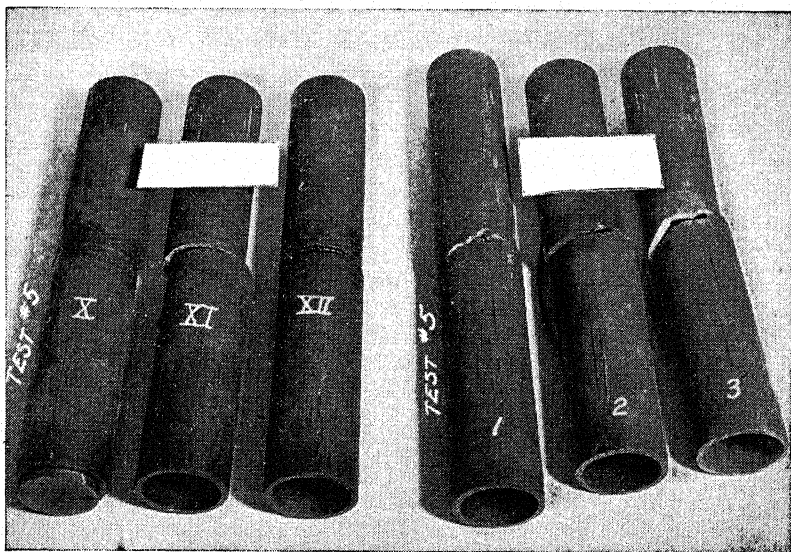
Three samples at left (X, XI, and XII), made by former method sheared completely off at welds. Arc welded samples failed by cracking only part way.
